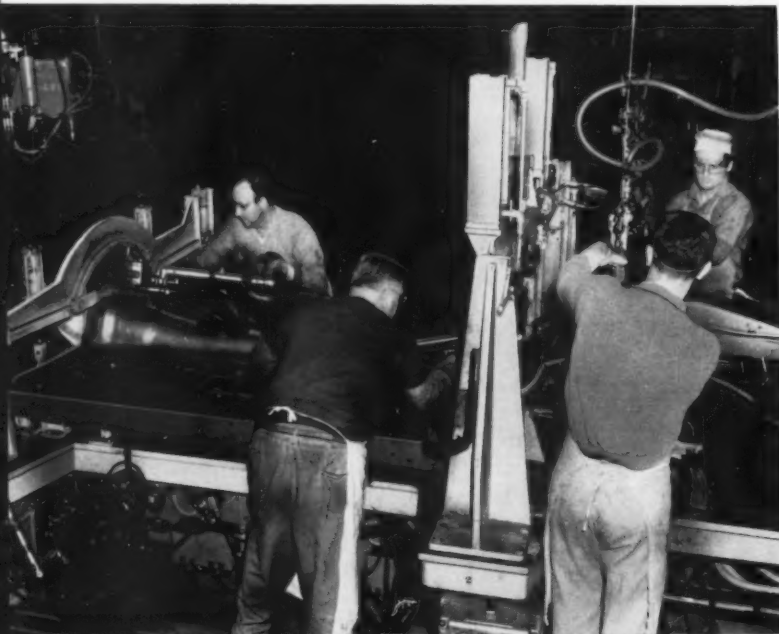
Five-ton welding fixture is used to position and join the three main floor-pan stampings. The stationary halves of the two cross-clamps (beneath the pan) serve as the lower electrodes.
